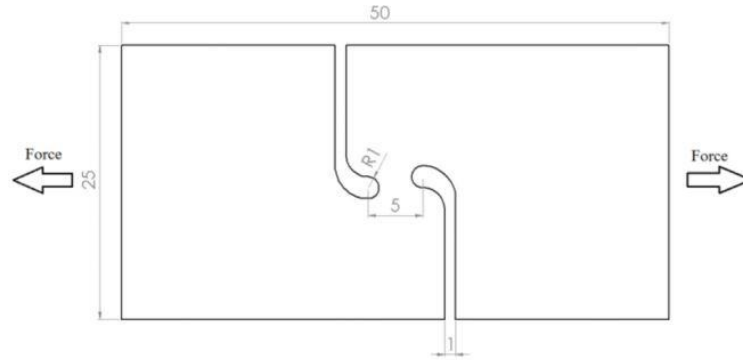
Mini-Shear Specimen Geometry (All dimensions are in millimeters) [57][58]
